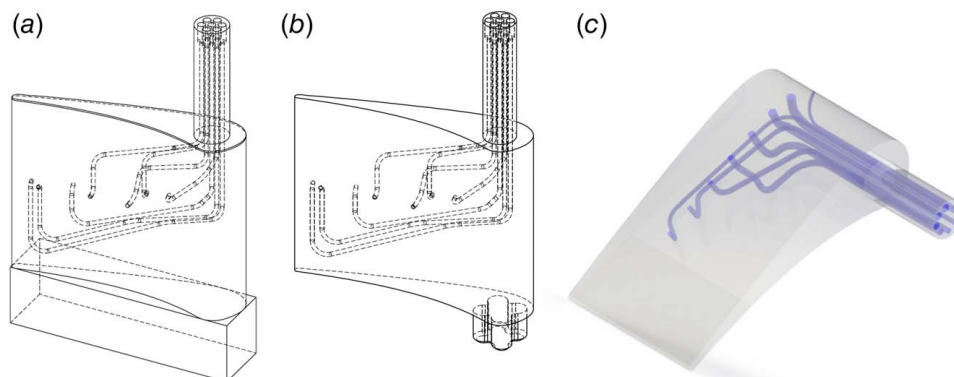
(a) 3D printed turbine blade with internal channels, (b) blade after machining process, and (c) sample 3D view of a finished blade
